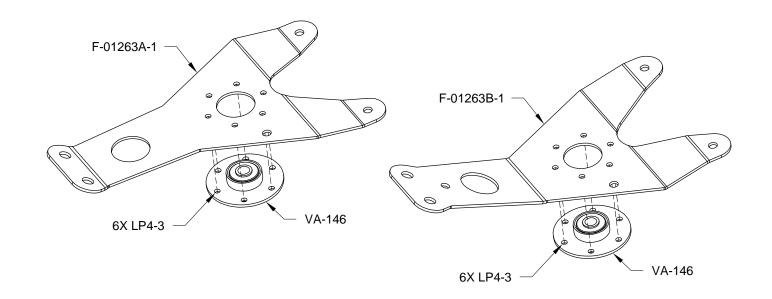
ATTACHING THE FLANGE BEARINGS
